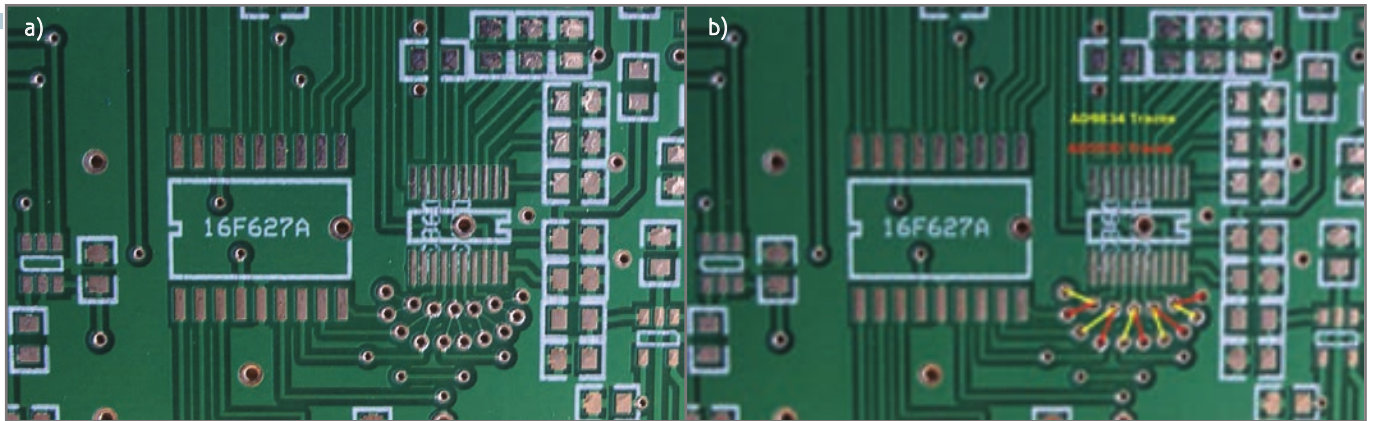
Magnified views of the printed circuit board (PCB). a—A virgin PCB with both sets of configuration traces intact. b—The two sets of traces used to configure the PCB are color coded to show the different traces.
